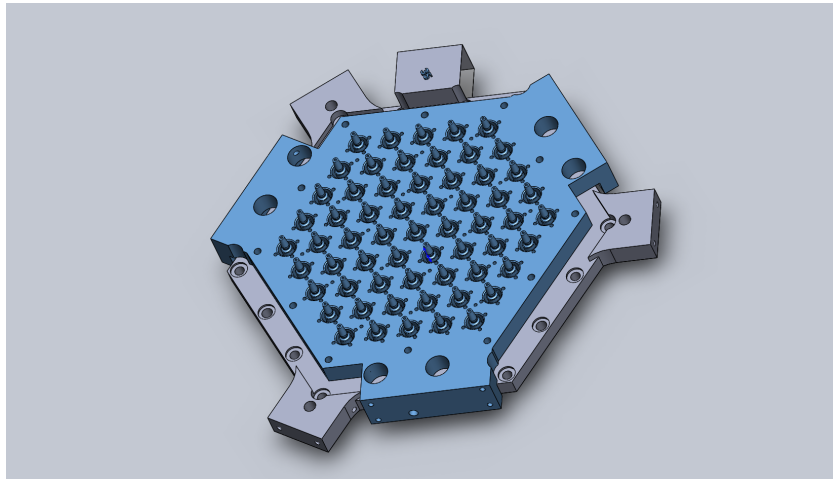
CAD Model of the Flowerbed created by H.P. Vuong, bottom view, showing the control plate of the assembly, indicated in blue color
